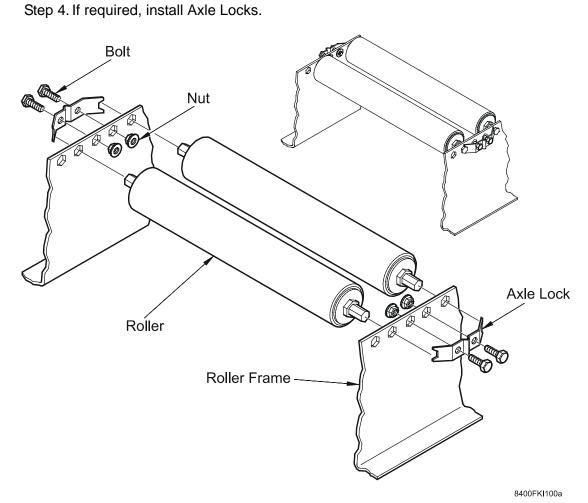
Installing Axle Locks (configuration shown is for 3" roller centers, Straight Intermediate section)
